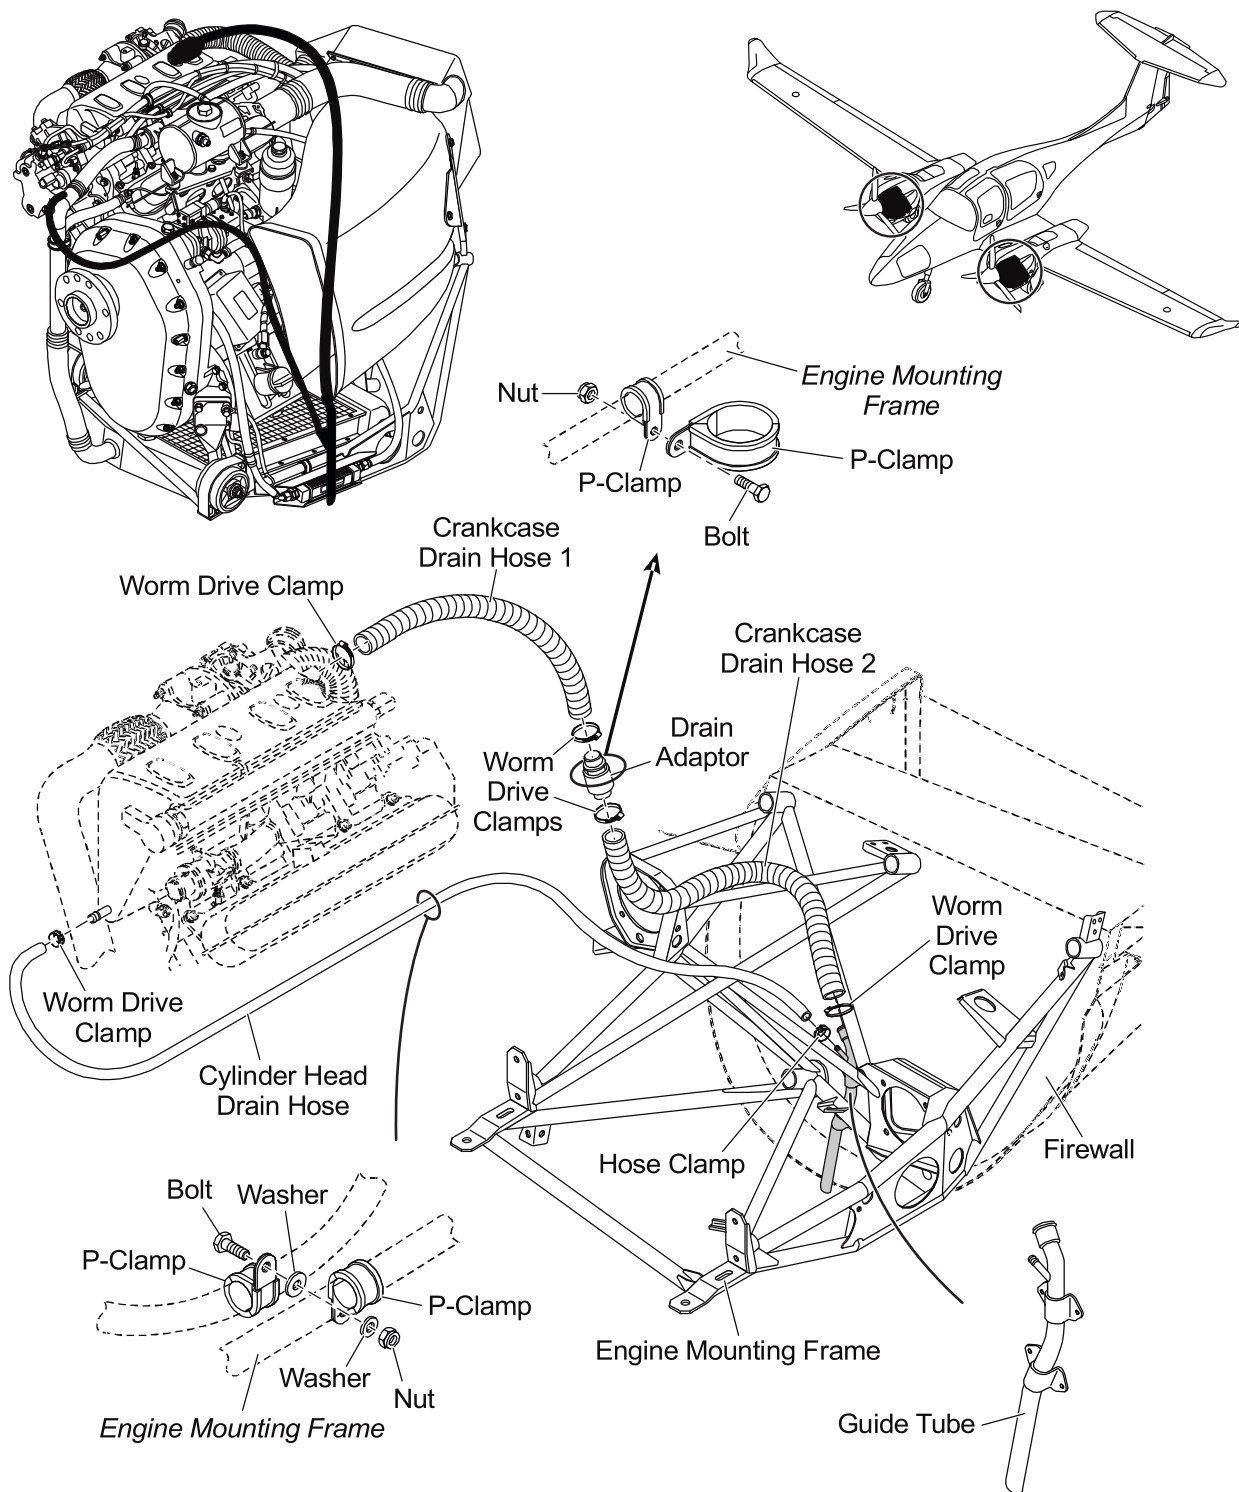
Engine Cylinder Head Drain and Breather Hose Assembly
